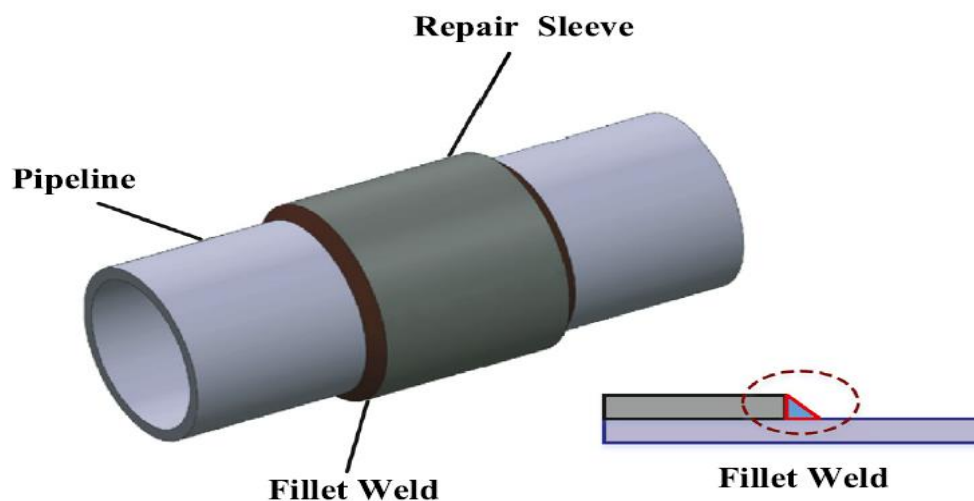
Schematic diagram of type-B sleeve repair method for a corroded pipeline [109].
